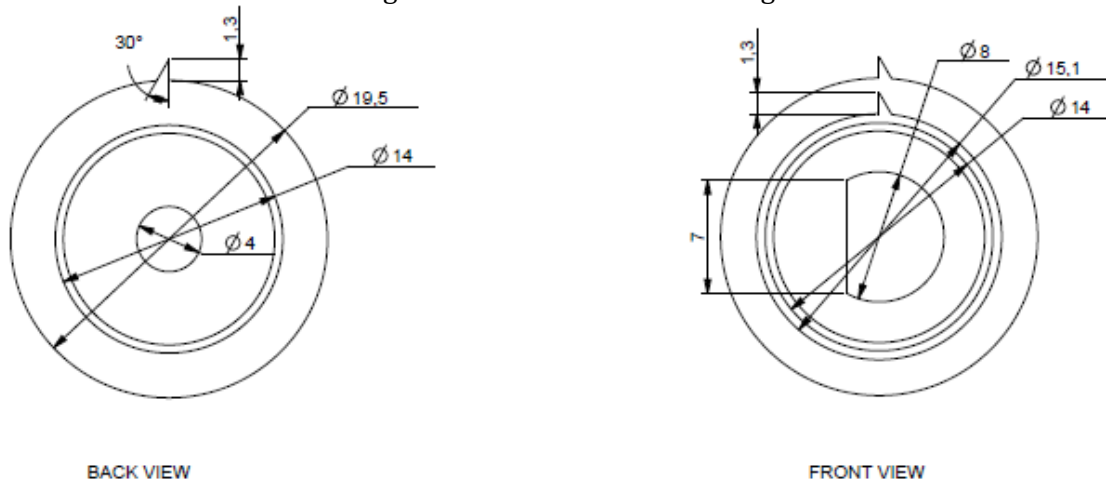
Back and front view of the 60mm chinchin cutting shaft
